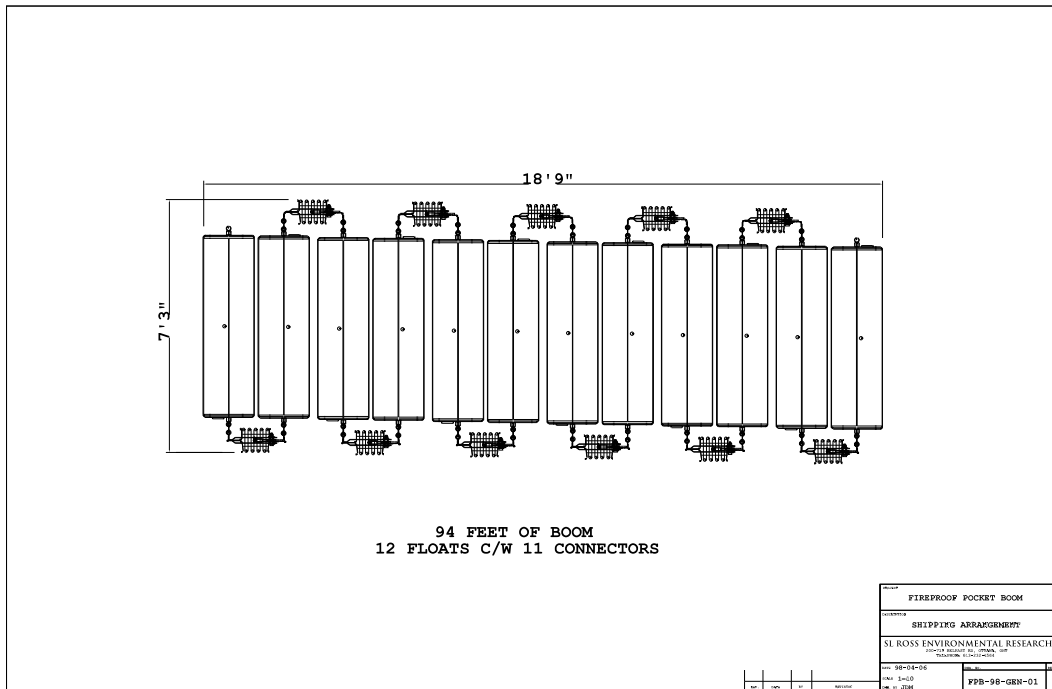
Sketch of Pocket Boom Layout Inside an ISO Container.
